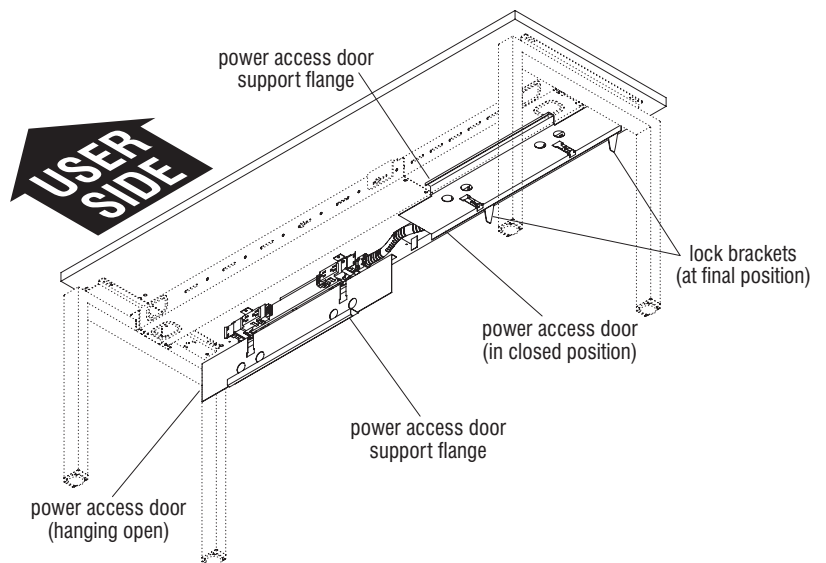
Single-Sided Fixed Benching Power Access Door Installation
